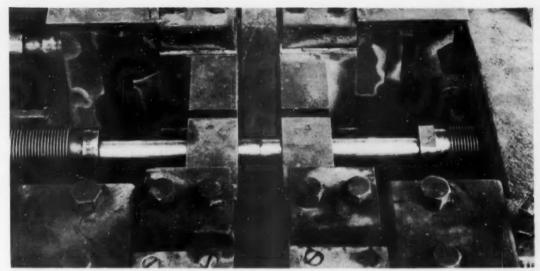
Workpieces in machine before flash welding. Forging pressure is exerted through adjustable back-
